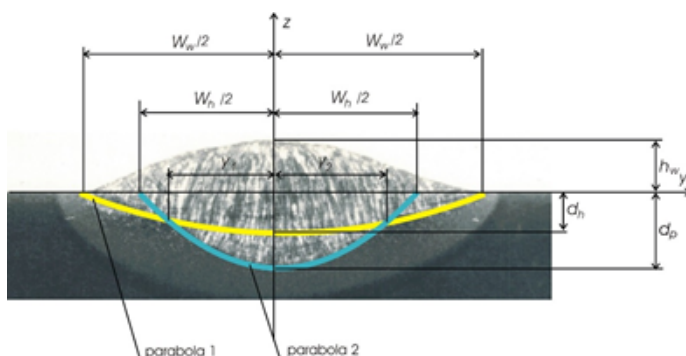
Scheme for calculating the cross-sectional area of the weld with an irregular fusion zone shape
